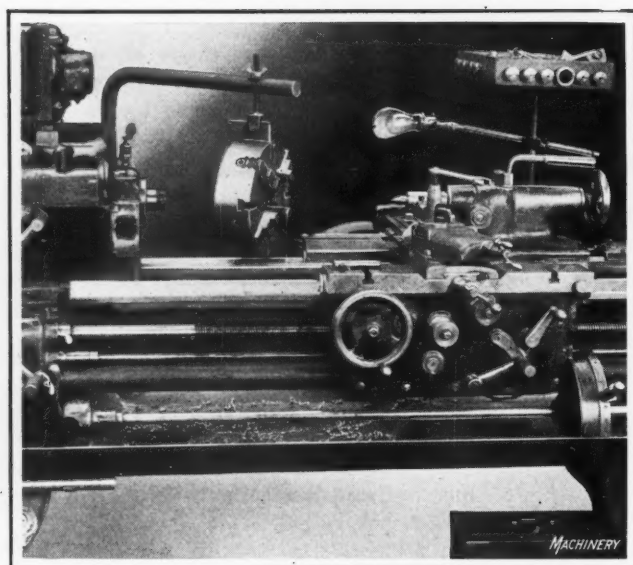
Engine Lathe provided with such Auxiliary Equipment as a Chuck Crane, a Collet and Instrument Stand, and a Tool Box
